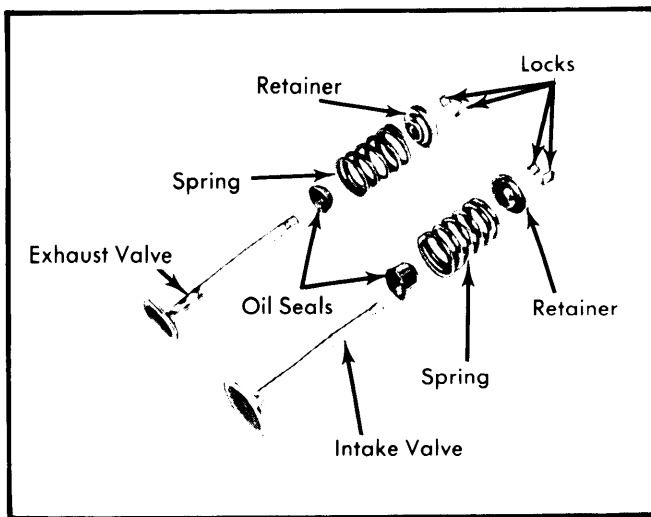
Exploded View of Intake & Exhaust Valve Assemblies
